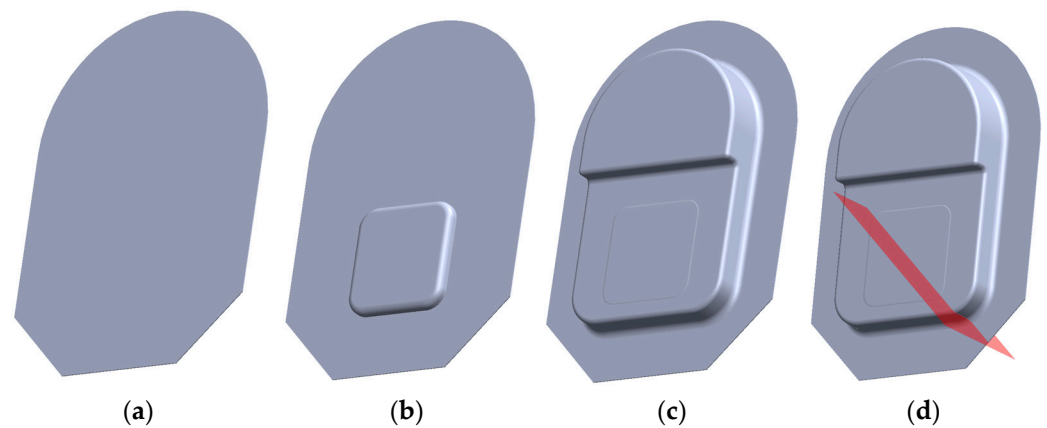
AA5754 (a) undeformed blank; (b) shape after the deep drawing (DD) step; (c) shape the reshaping process (d) Cutting plane (highlighted in red), used to measure the residual ΔH .
